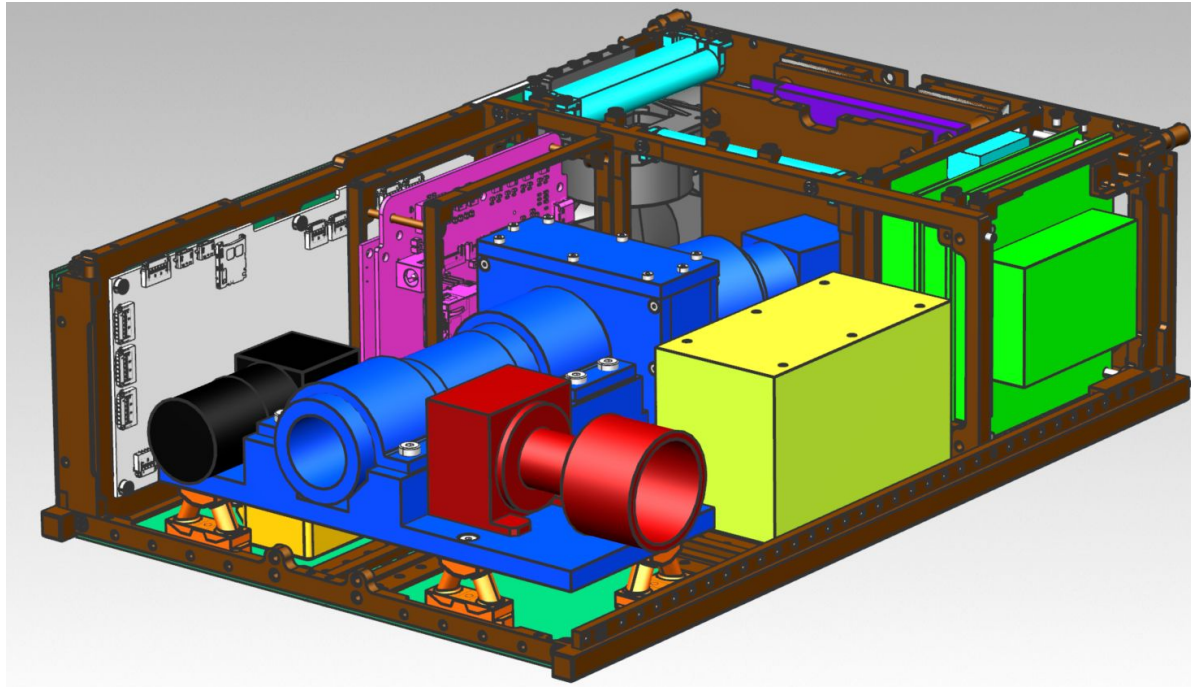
Payloads mounted on a 6U CubeSat frame wall
